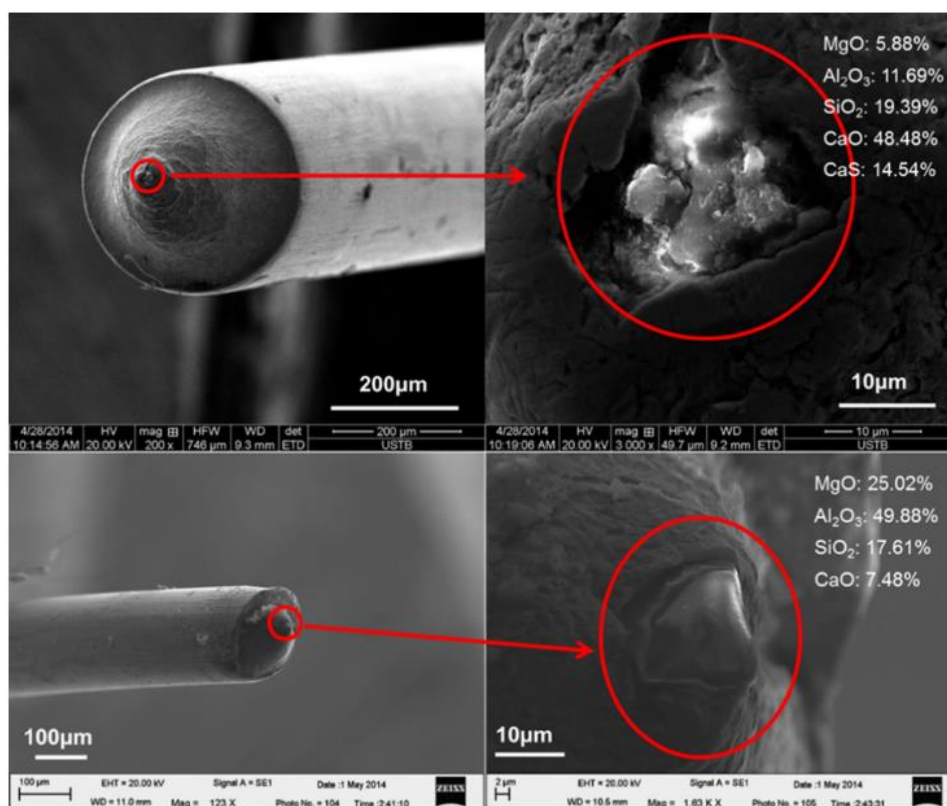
Example of fracture due to inclusions on  $\varnothing 0.20\text{mm}$  wires [27]
